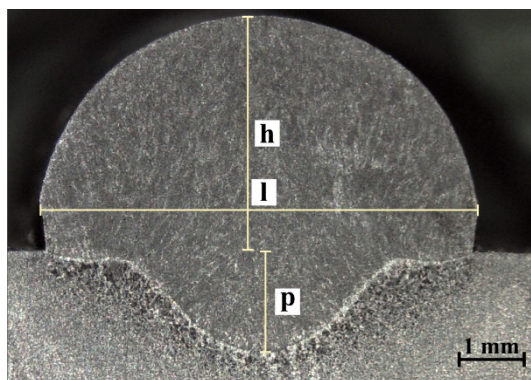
Cross section of the weld bead showing the geometry.
